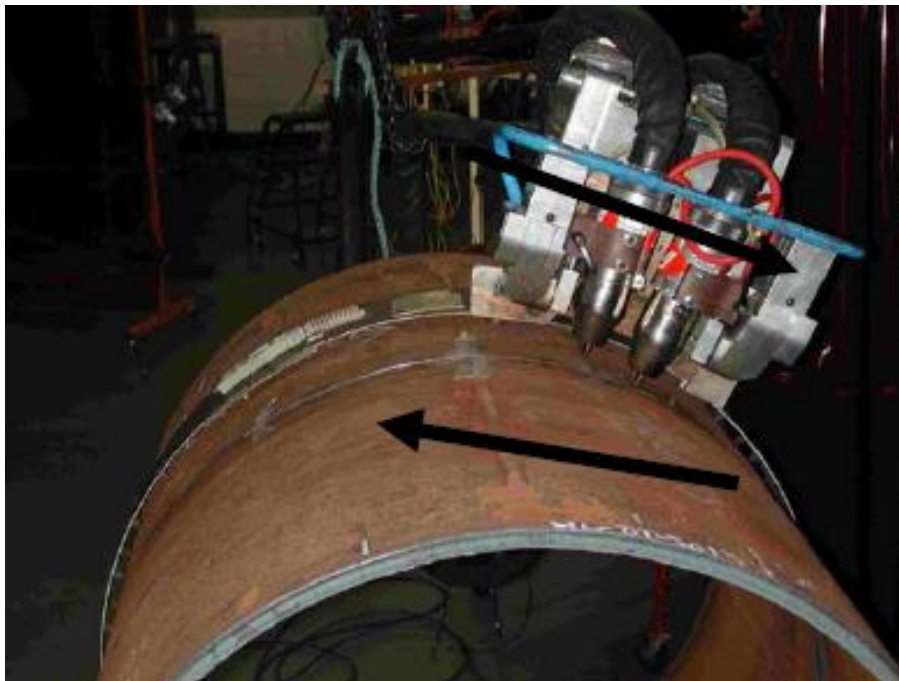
Dual Tandem welding - Welding carriage and Fronius tandem torches (Liratzis, 2007)
